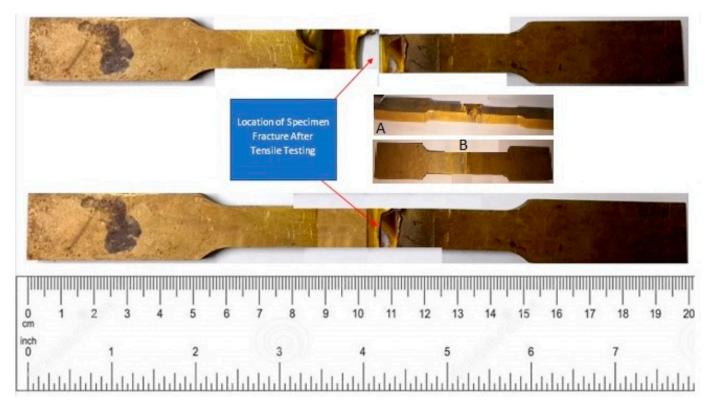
A top view of broken FSW sample with (A) side view and (B) bottom view.
